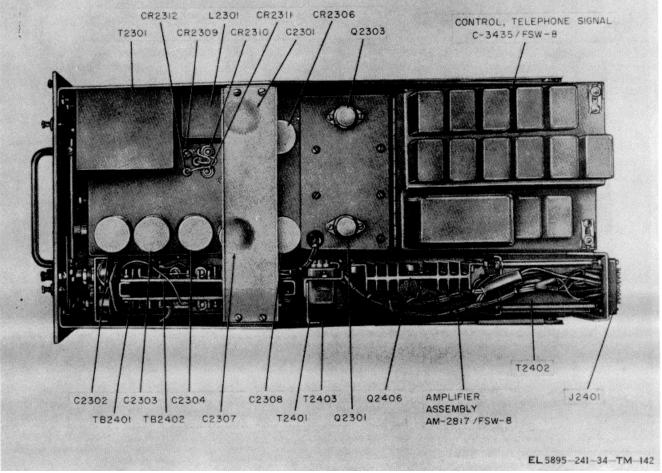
Amplifier Assembly AM-2817/FSW-8 and Power Supply PP-2795/FSW-8, top view, parts location.
